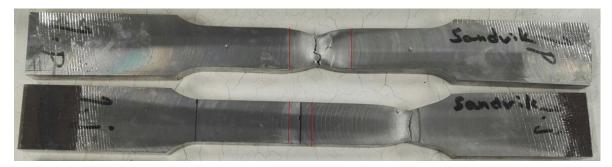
Test piece 5 TKU1: transverse tensile test specimens
